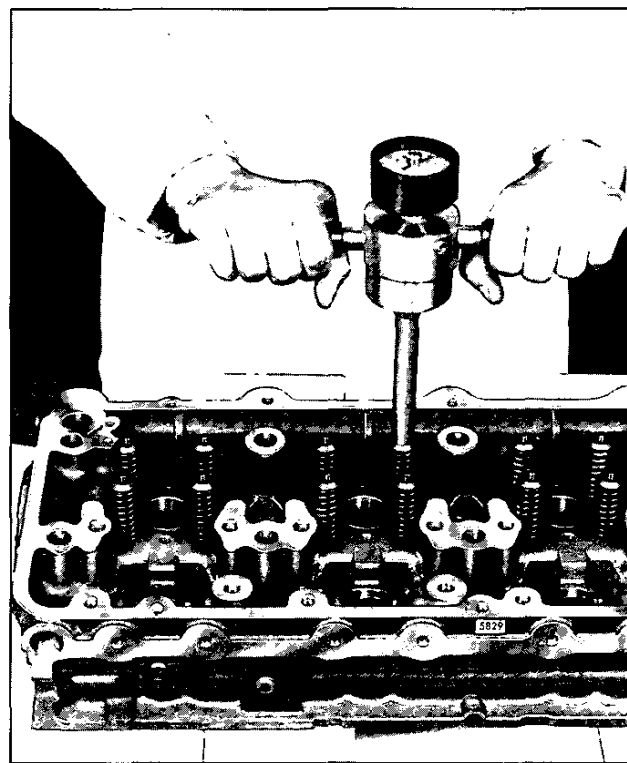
Checking Valve Opening Pressure with Gage J 25076-B
